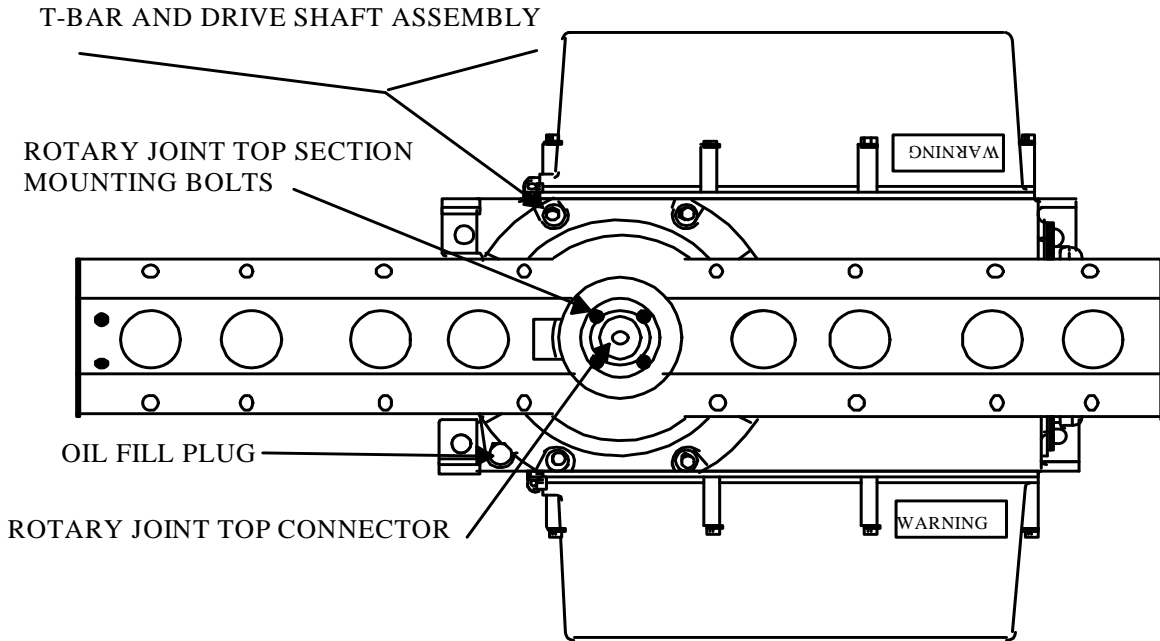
S-Band MTR Up Rotary Joint and T-Bar Assembly Top View
